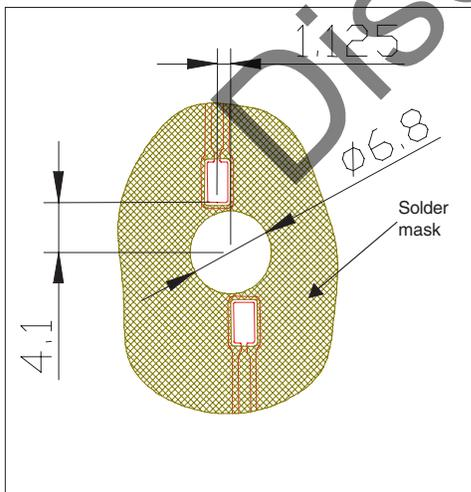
Solder Mask Protects Traces While Exposing Solder Pads and Slug Attach Areas for Array Assembly.
